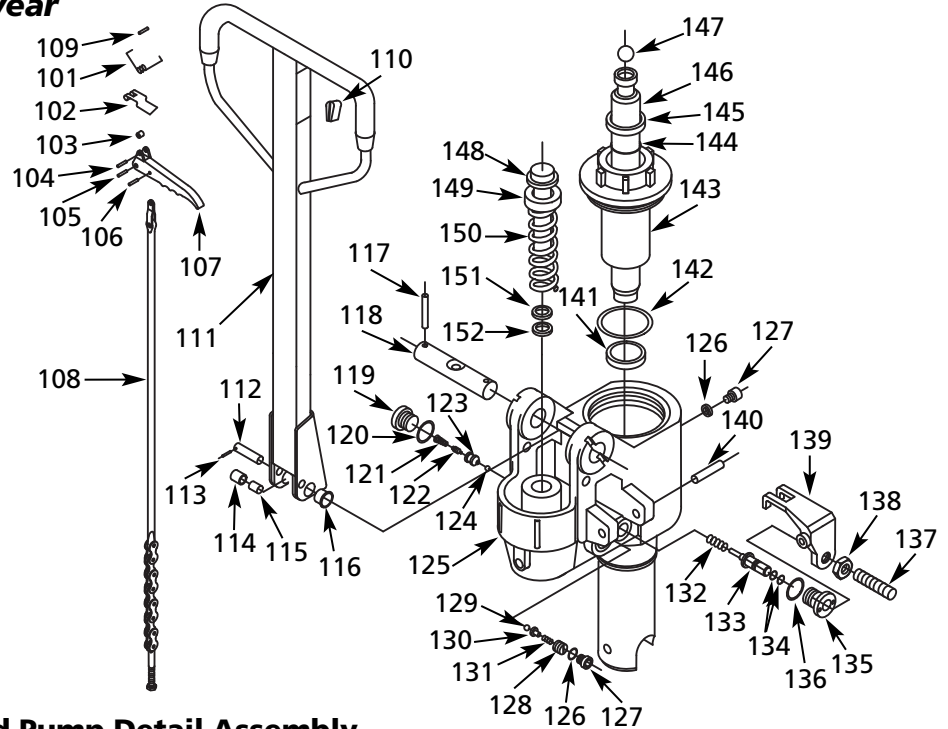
Repair Parts Illustration for Handle and Hydraulic Pump Assembly
